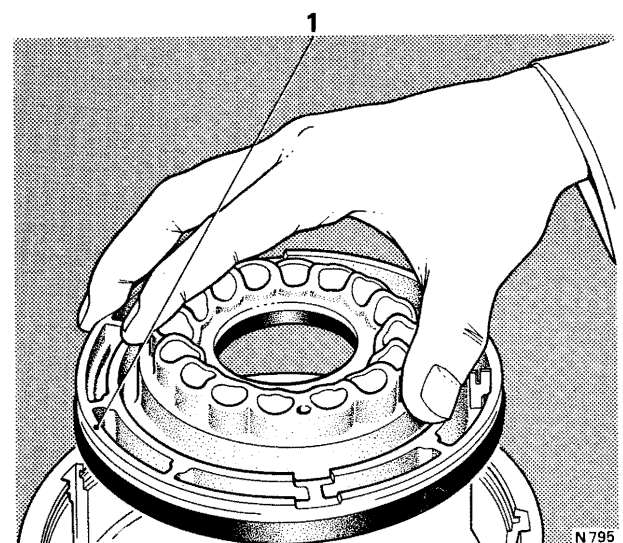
REMOVING THE FORWARD CLUTCH PISTON
